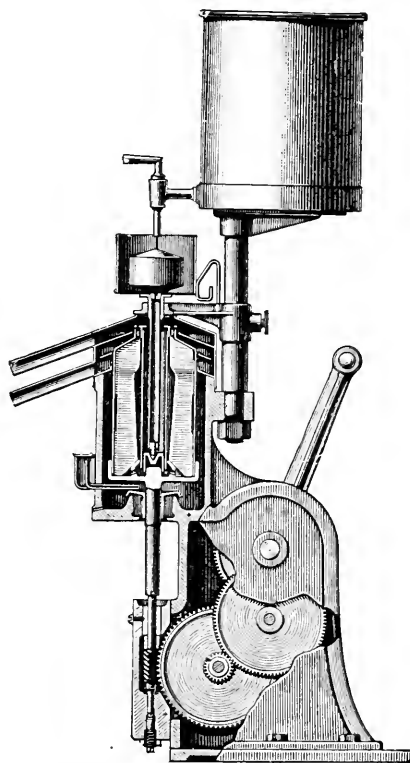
Burmeister & Wain's Hand-power Separator. (Perpendicular Section.)
